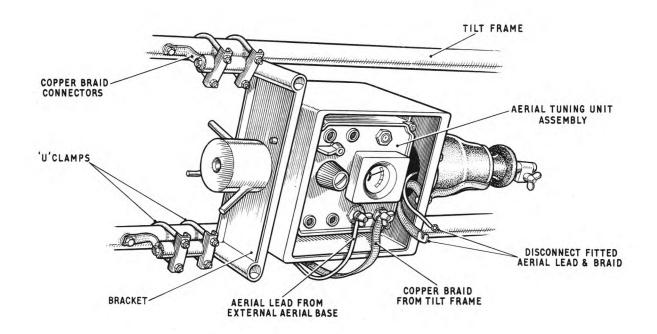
DISMOUNTABLE VHF ATU ASSEMBLY ON THE TILT FRAME
